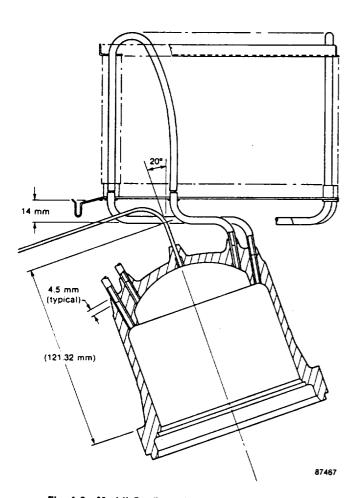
Mod II Configuration No. 4 Heater Head with 3-Piece Tubes
